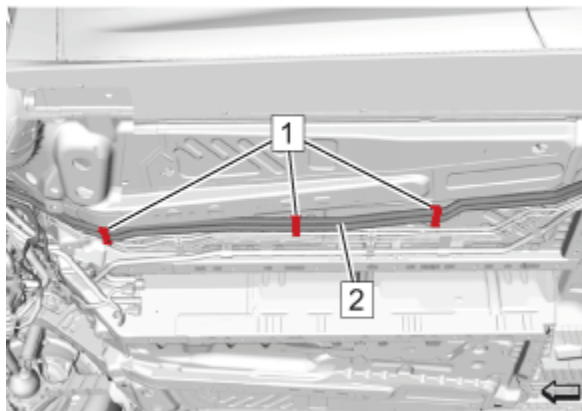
Drive Motor Generator Control Module Cooling Outlet Hose
